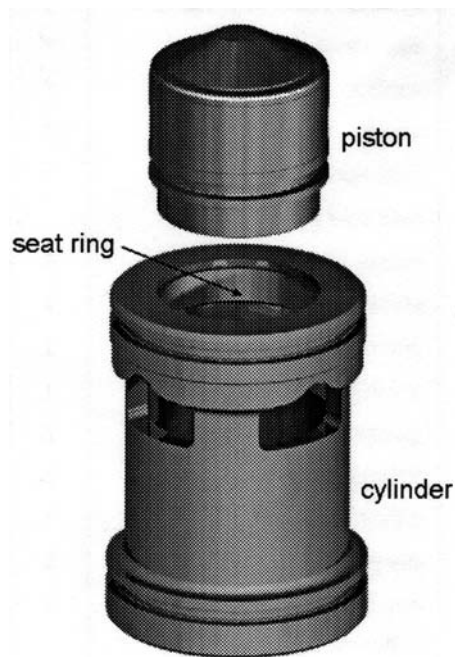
Using the Piston to Remove the Seat Ring from the Cylinder
